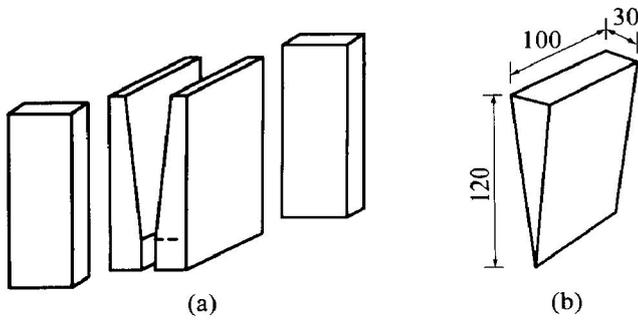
Schematic diagram of wedge-shaped copper mould and casting dimensions (mm)
